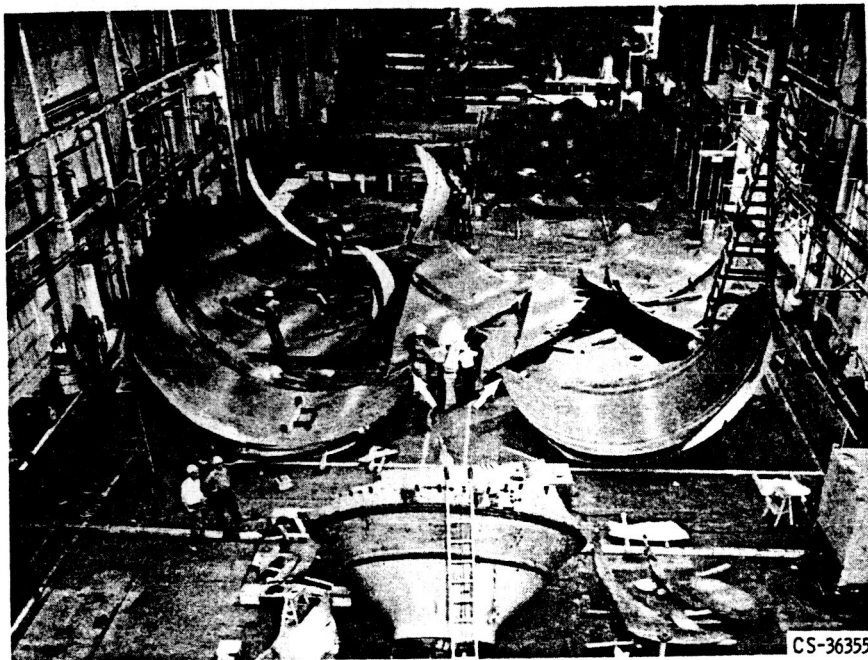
260-Inch-diameter rocket casing after failure during hydraulic proof testing. Arrows indicate weld flaw which caused failure.
